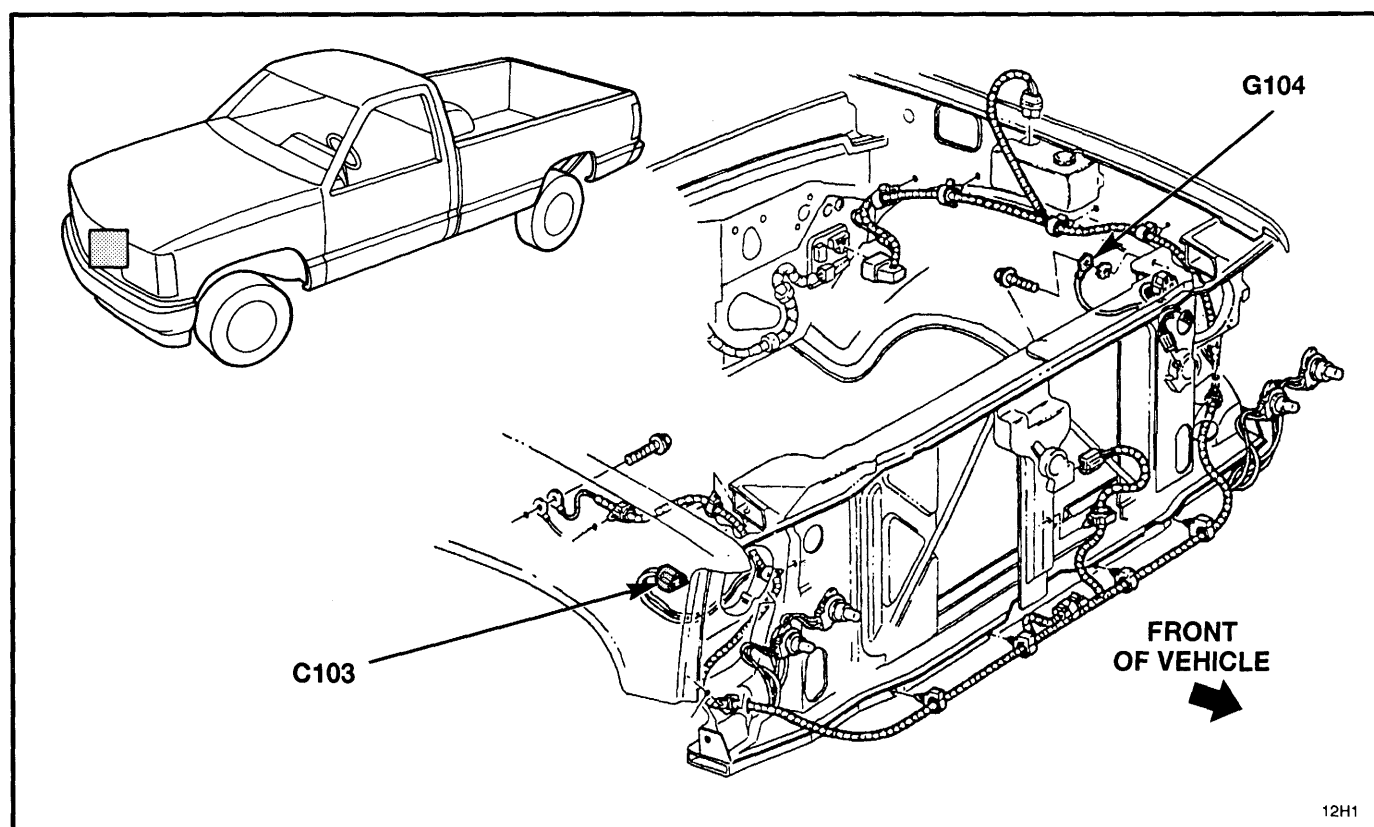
Forward Lamp Harness, Dual Headlamps — 2-Door Pickup
